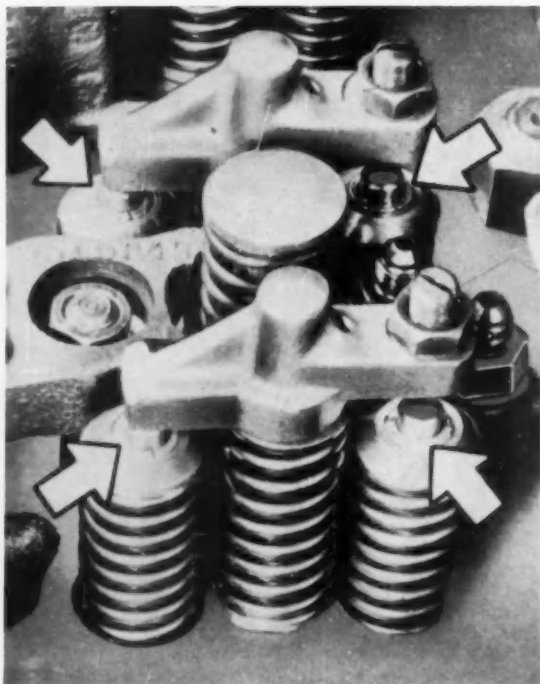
(below) Injection system installed on a 1957 passenger car engine
